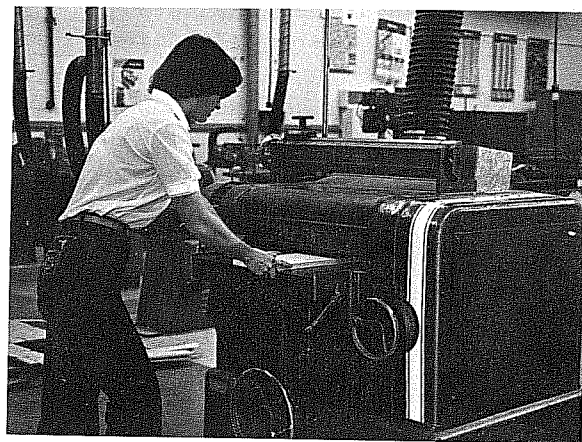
Stand to one side of the board as you feed stock into the surfacer.
